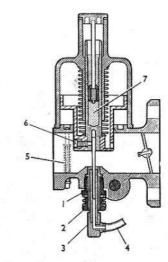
SECTION VIEW OF THE HS4 CARBURETTER.
